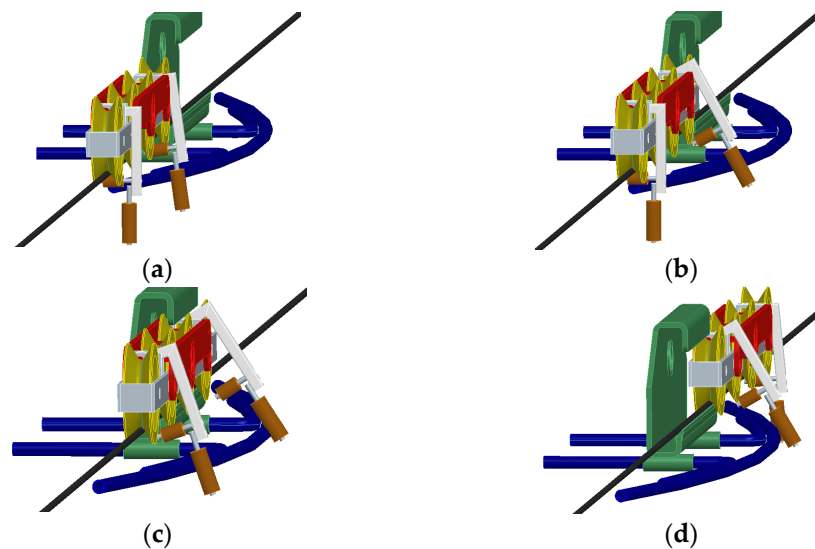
Sequence of carriages passing through the middle tower mechanism: (a) The carriage starts engaging the mechanism; (b) The cam-like blue element of the tower starts to lift the first roller of the carriage; (c) The blue element lifts the second roller; (d) The carriage leaves the tower mechanism.
